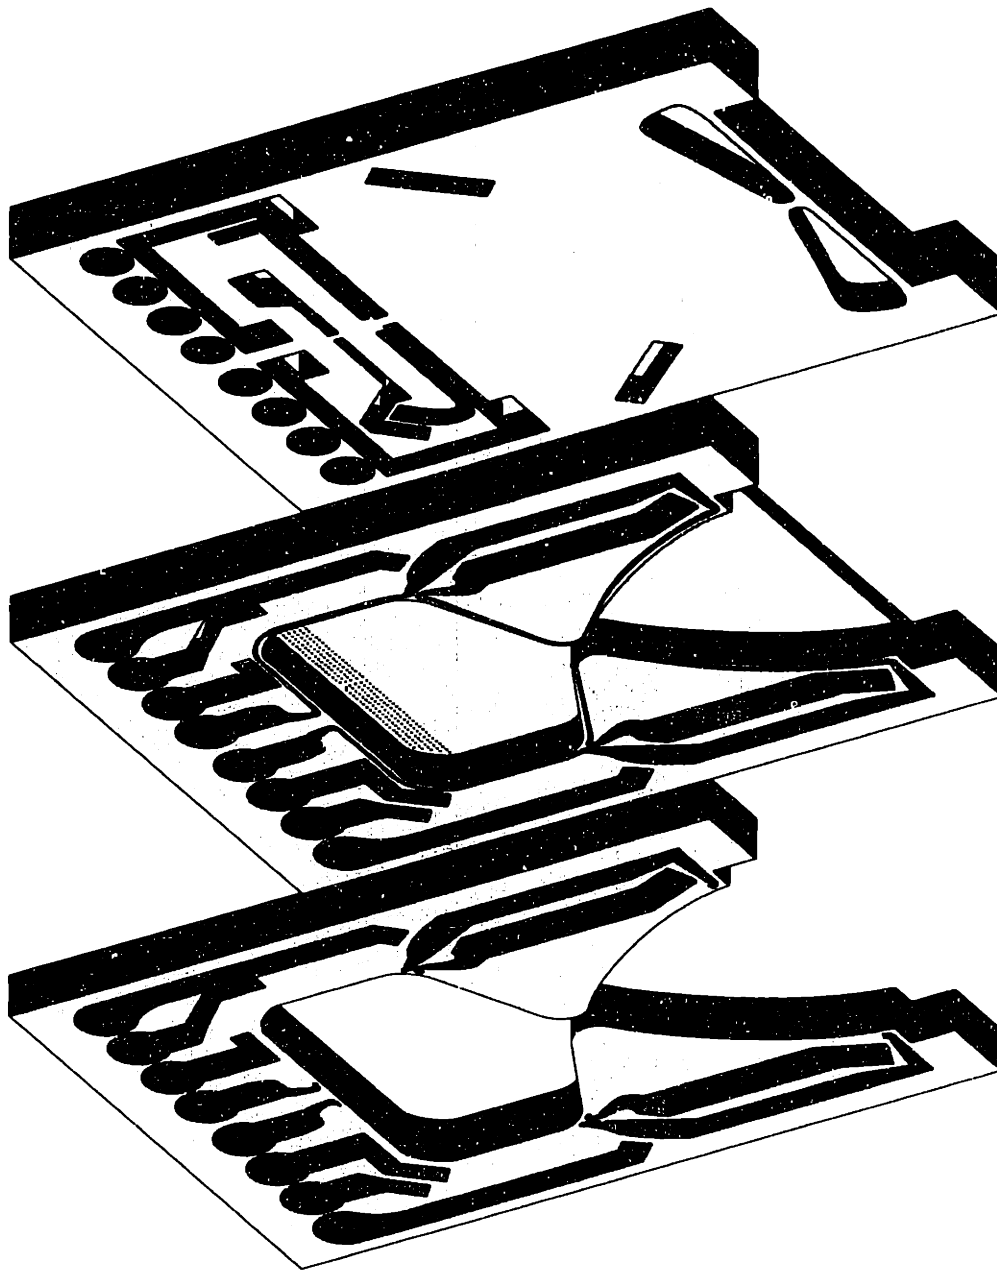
Micro-Rocket Engine Wafers Layout and Assembly.
